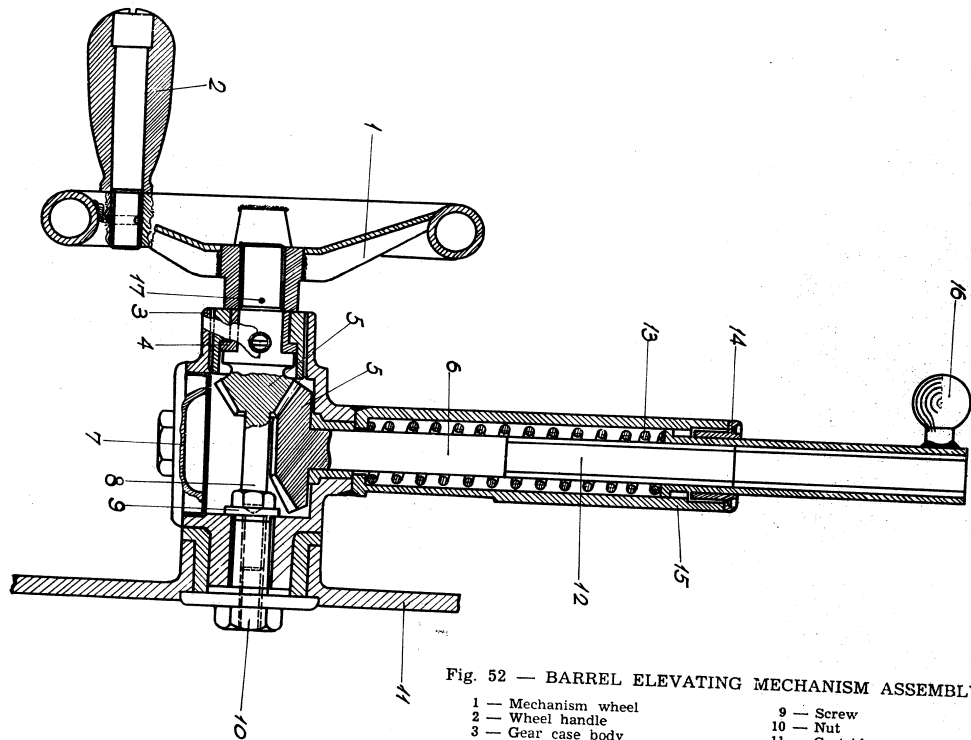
BARREL ELEVATING MECHANISM ASSEMBLY
